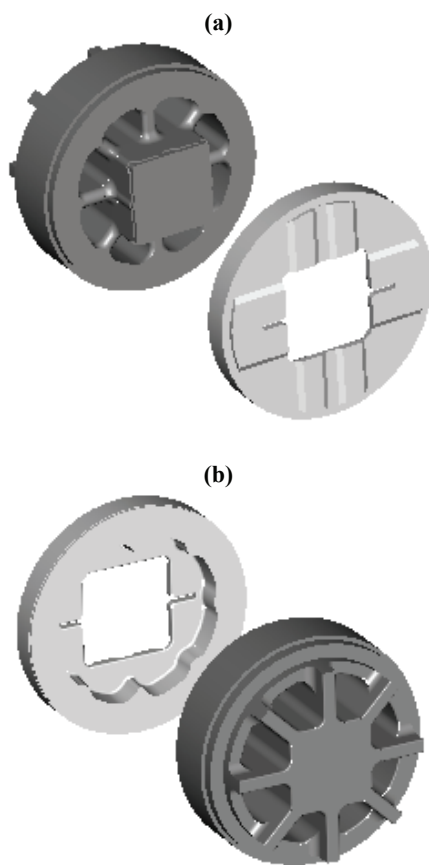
(a) Front- and (b) rear-view of the 8 port-hole die-assembly.
